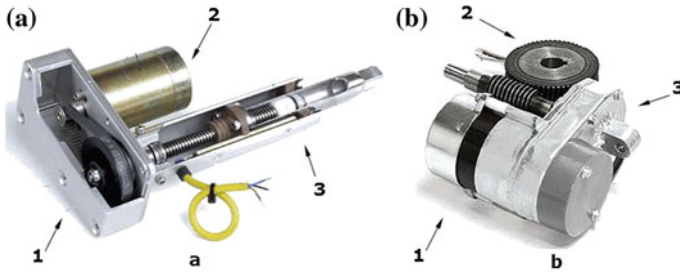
Examples of actuators. a Linear actuator with screw-nut, and DC motor, 1—speed reducer, 2—DC electric motor, 3—screw-nut mechanism (<http://www.ultramotion.com/products>). b Rotary actuator with worm gear, 1—AC electric motor, 2—worm gear, 3—planetary gearbox (<http://www.tradekorea.com>)
